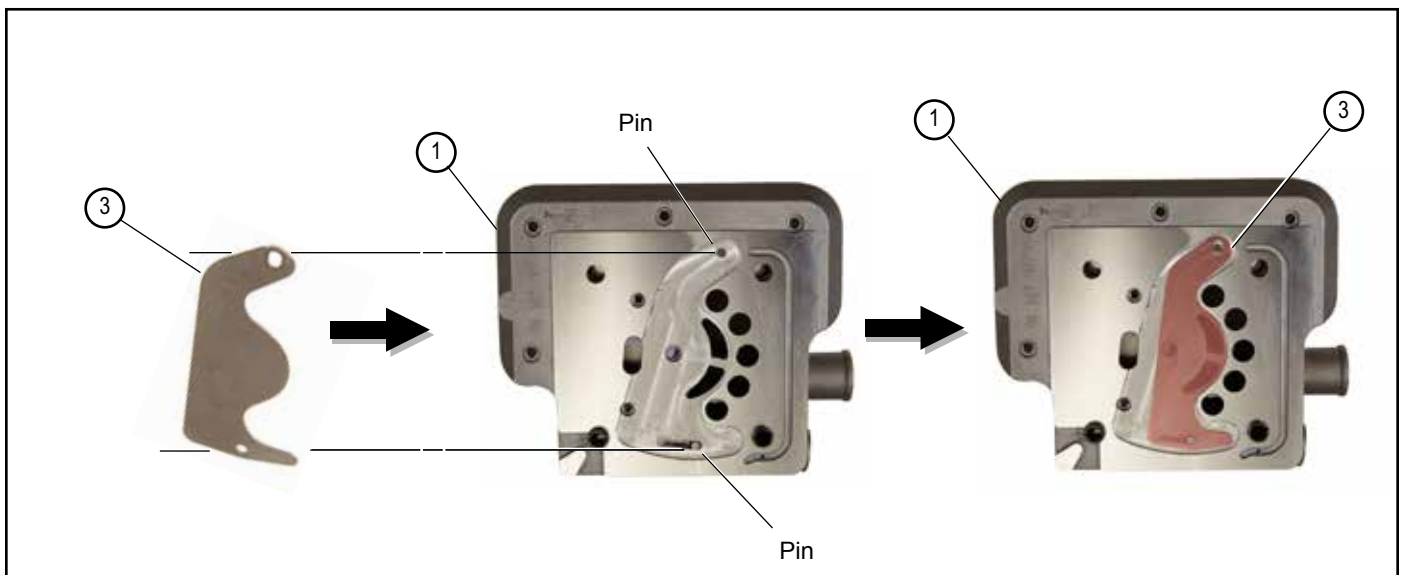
WABCO® 85MM COMPRESSOR CYLINDER HEAD ASSEMBLY - SLIDING LEAF VALVE INSTALLATION
